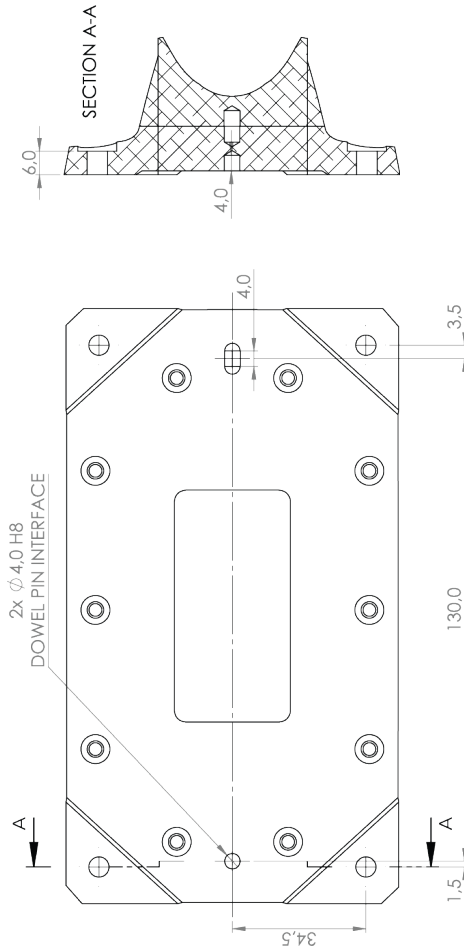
MRU Marine / MRU Marine H technical drawings: bottom view.
